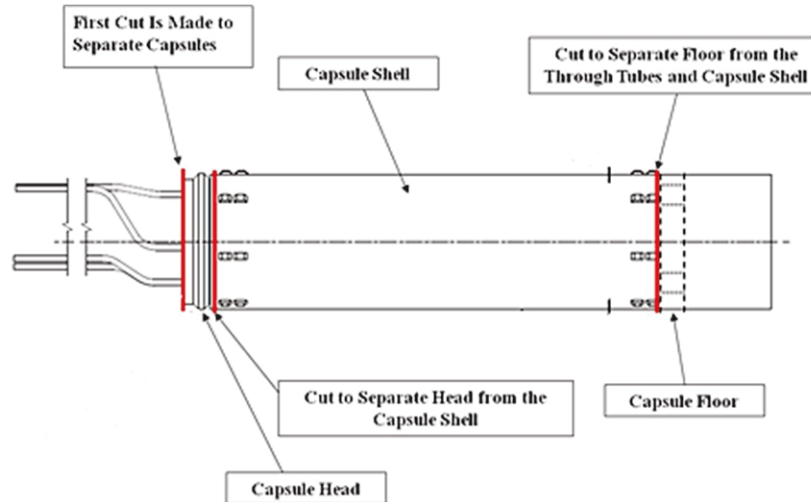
Circumferential cuts made to separate capsules and to disassemble each capsule.
